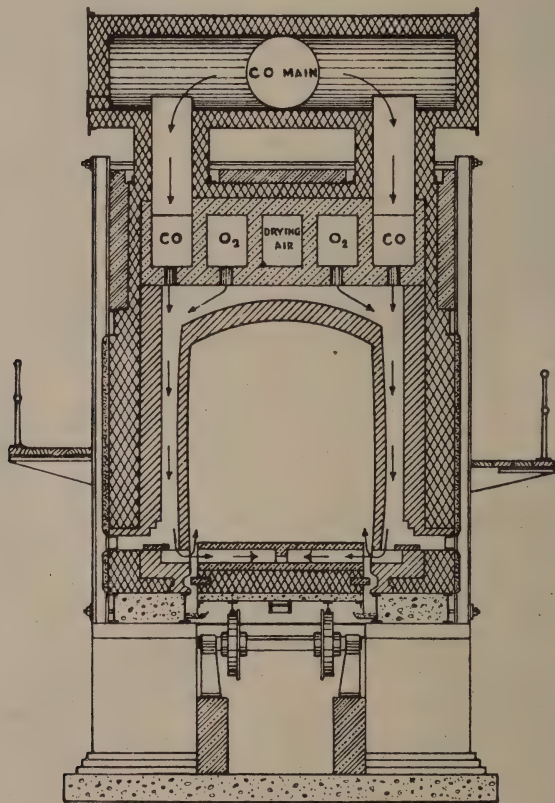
Continuous kiln: (C) W-D circular tunnel kiln.
